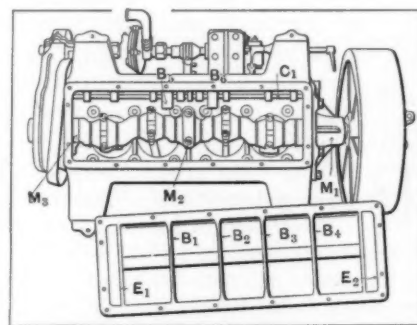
Underside of the motor with the reservoir removed showing the bearings and other details
